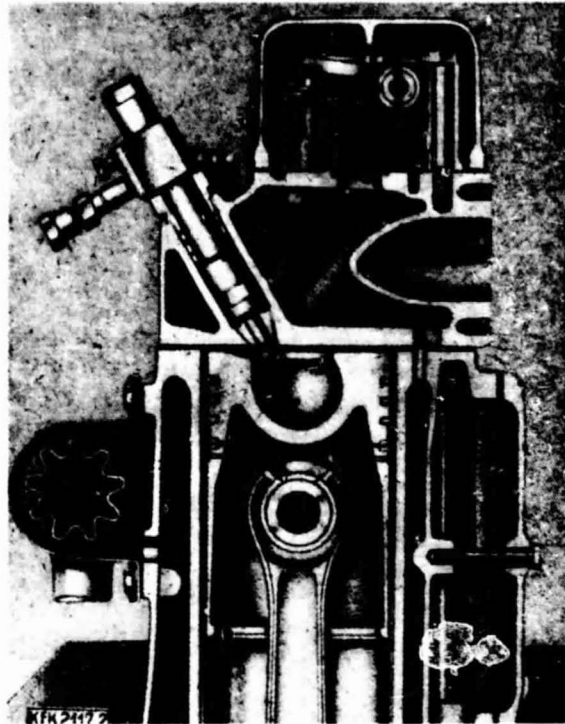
A. M.A.N. Evaporative Combustion System - Cross-Sectional View of Test Engine (Ref. 47)
